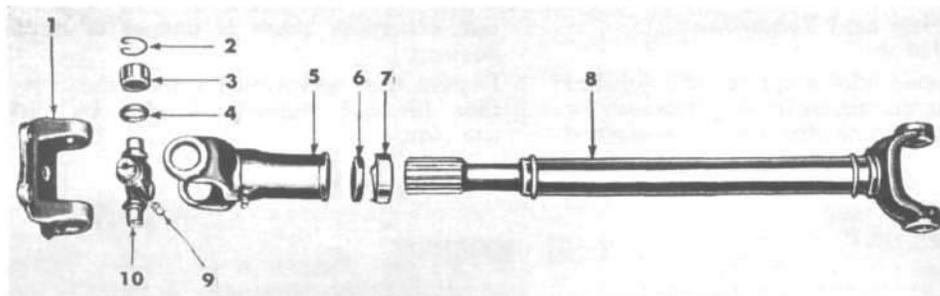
PROPELLER SHAFT AND UNIVERSAL JOINTS—NEEDLE BEARING TYPE
